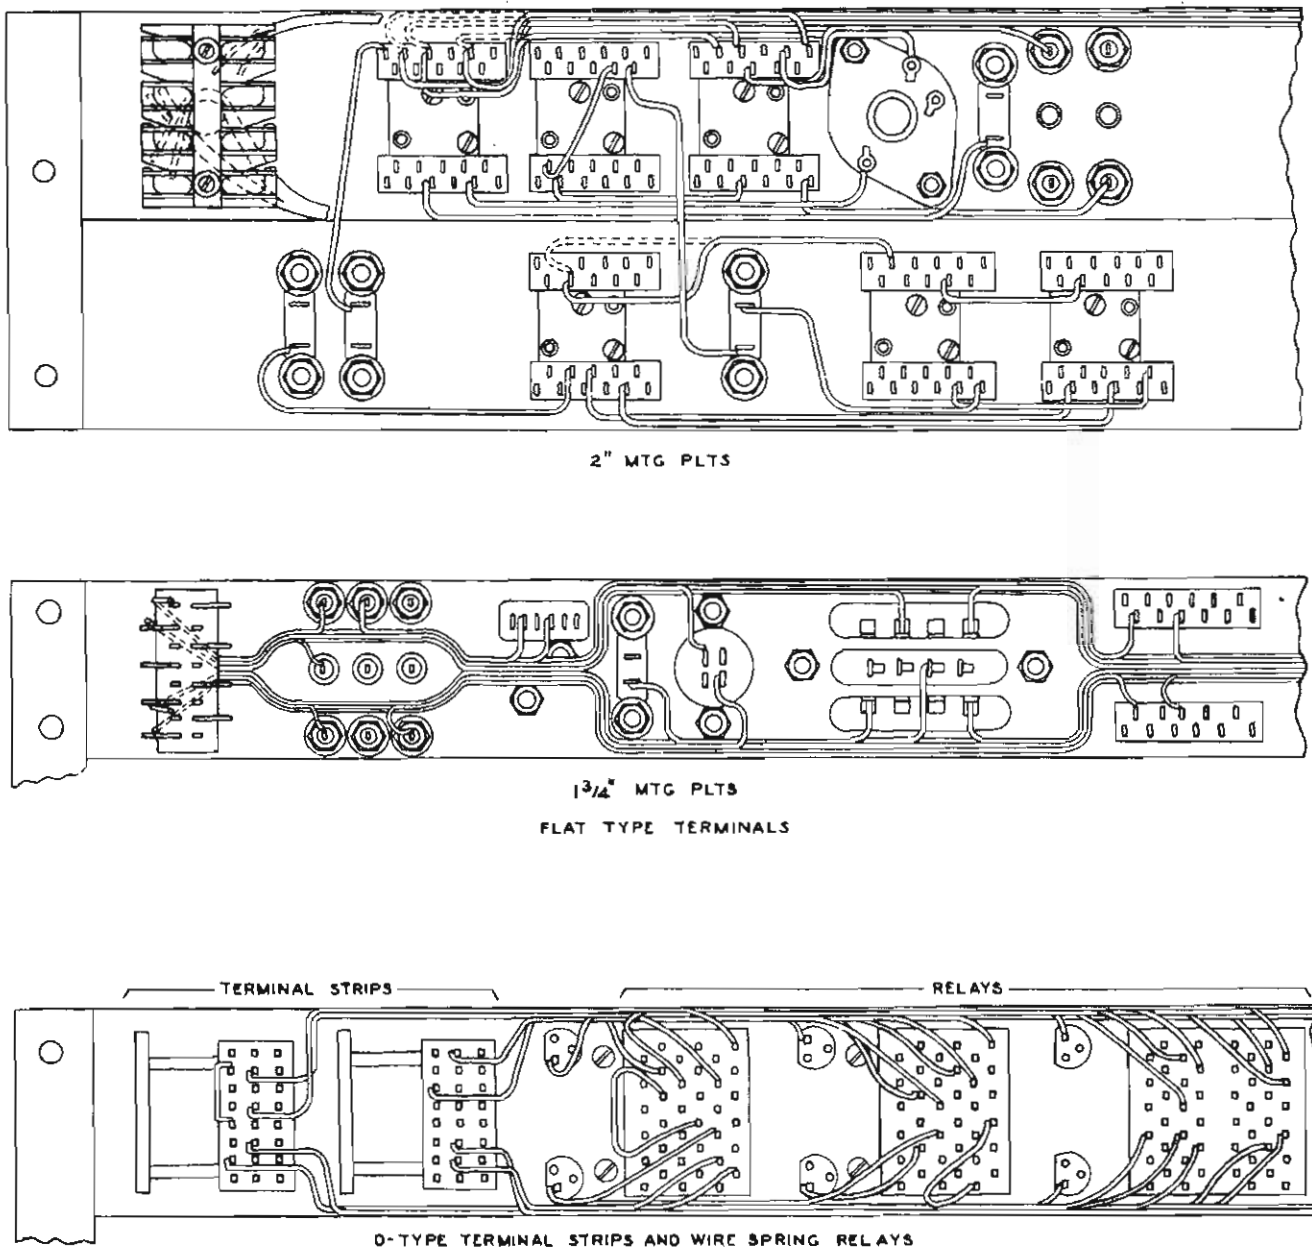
SURFACE WIRING - ARRANGEMENT OF WIRING IN PATHS -
